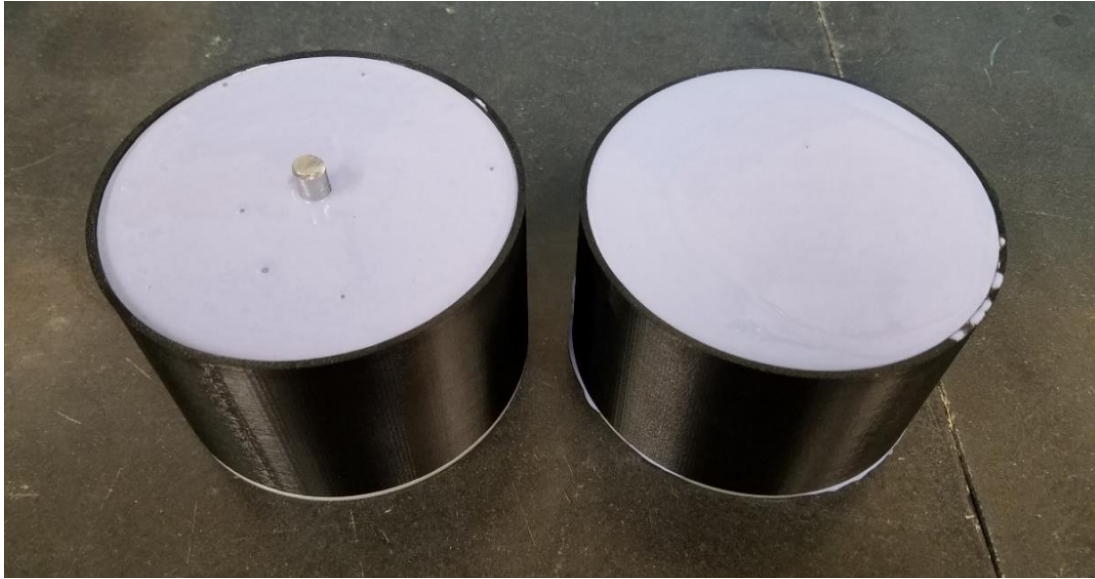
Silicone cured, and the mold negative is ready for disassembling.
